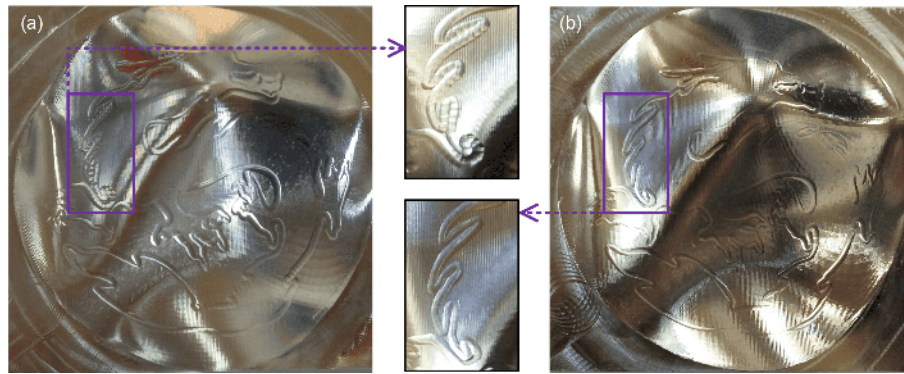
(Color online) Comparison of physical cutting results for different scheduled feedrate profiles. (a) Machined part without jerk constraint; (b) machined part with jerk constraint.
